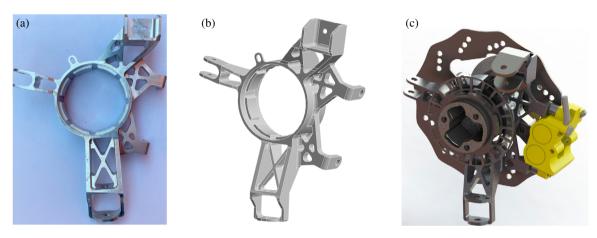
Upright component used for the fatigue assessment analysis; (a) machined upright made of 7075-T6 aluminium, (b) its CAD model and (c) a sub-assembly of the upright and the brake system.
